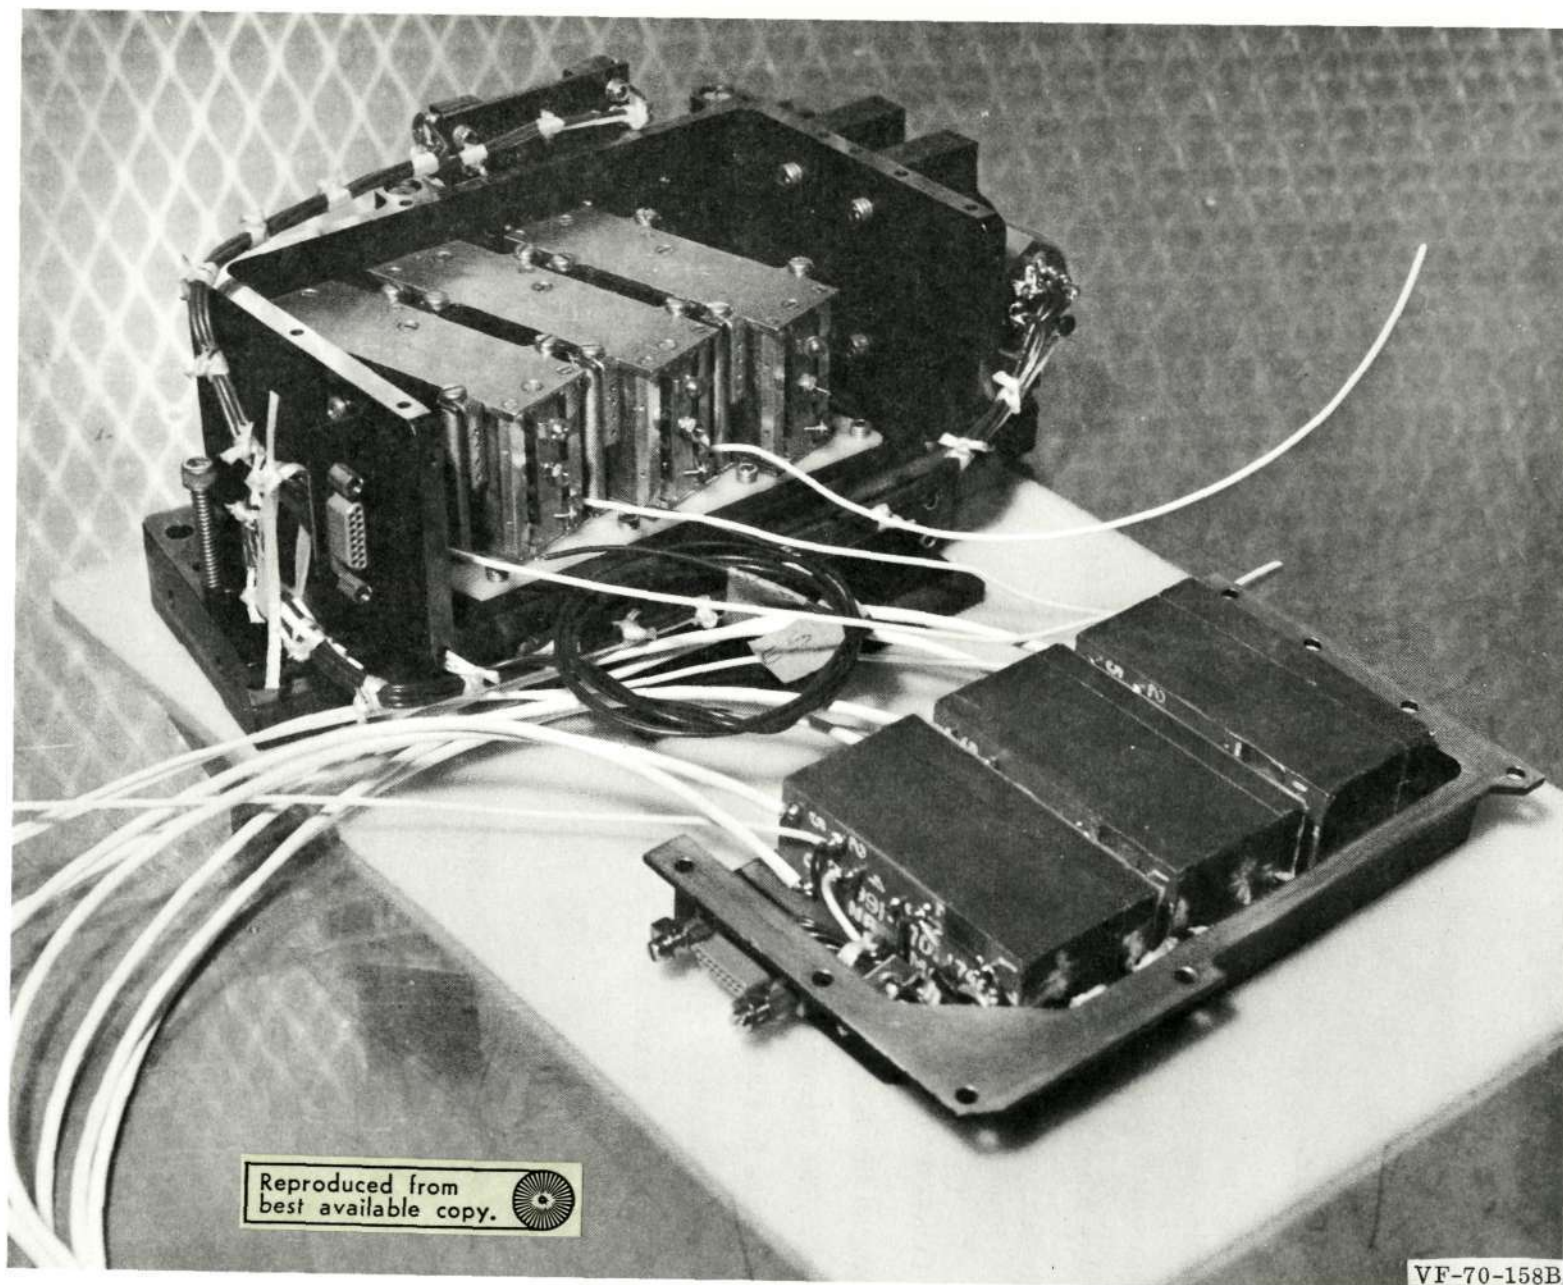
Encapsulation of Circuits in Welded Cordwood Modules Mounted Inside the Carriage Top Cover
